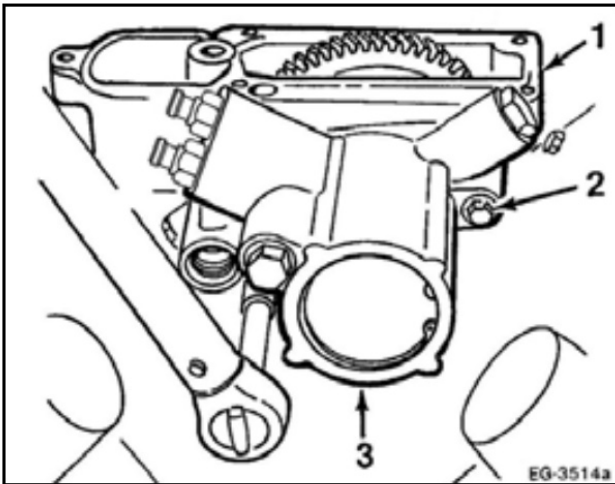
Installing High-pressure Oil Pump Mounting Bolts
